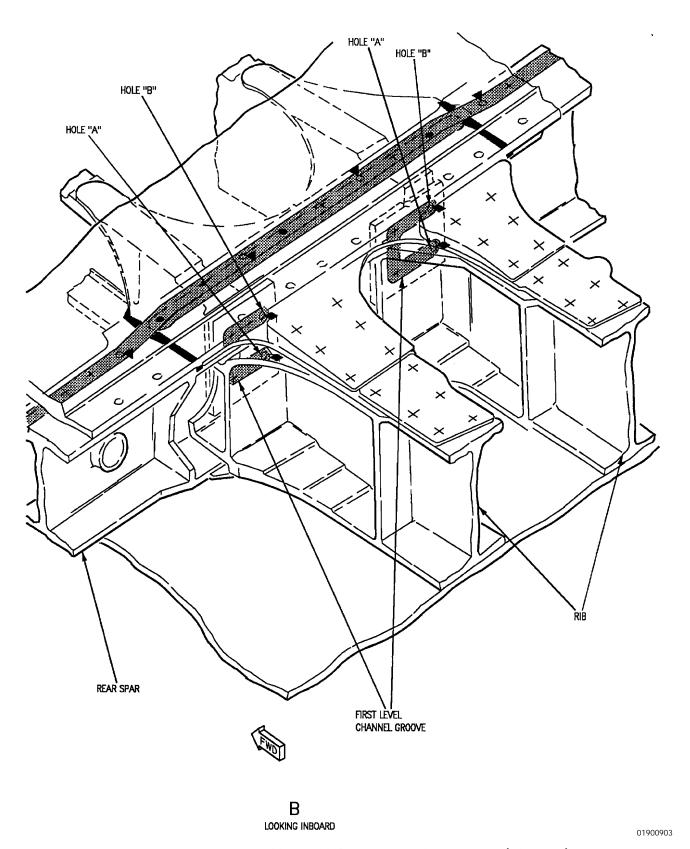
Rear Spar Channel Groove Seal Injection (Sheet 3)
